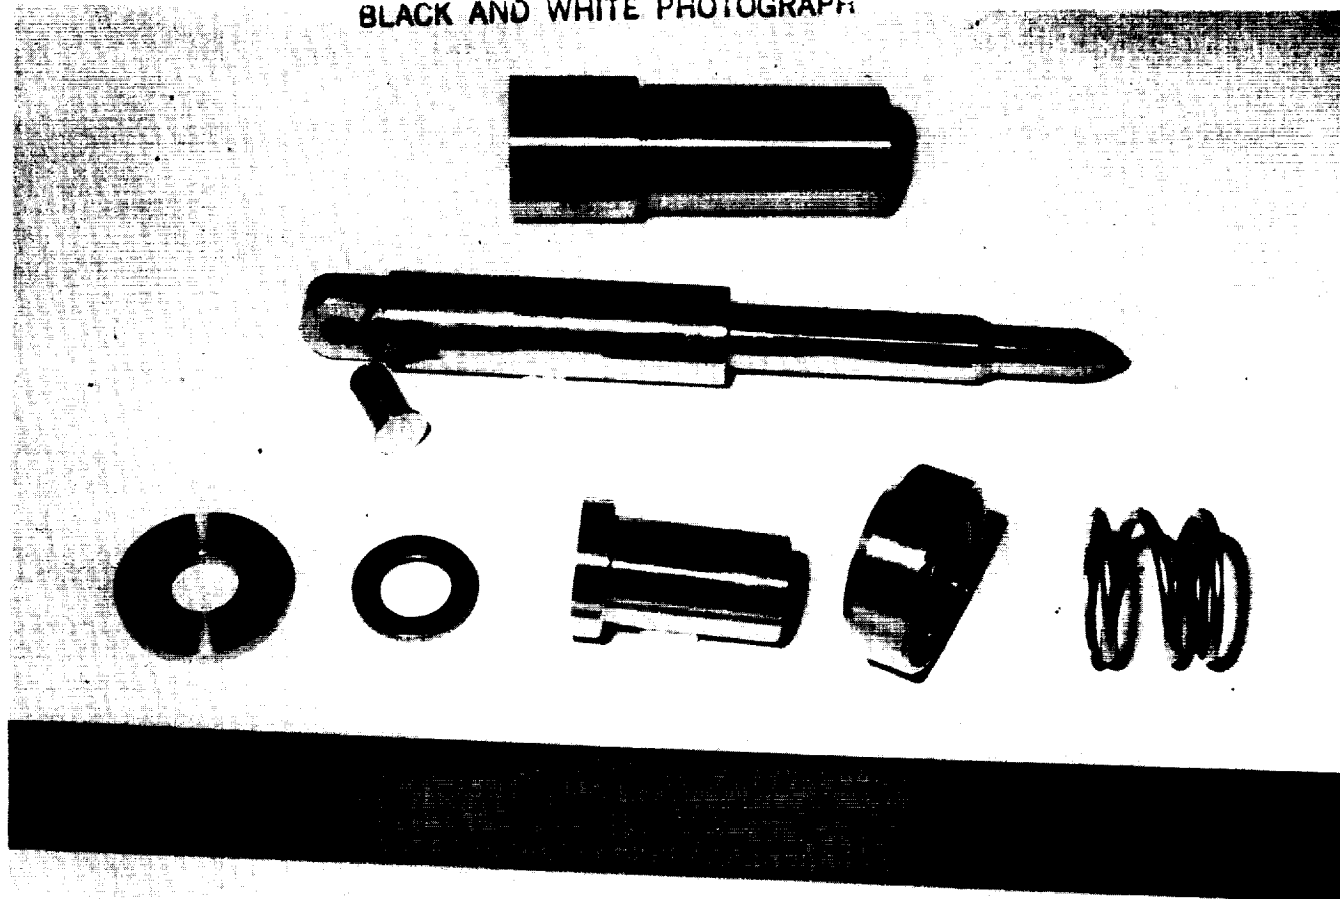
Photographs showing a more close-up view of the pin, belleville seat, belleville spring, "rigidizing" bushing, coil spring seat, and coil spring. The coil spring is for retraction only.
